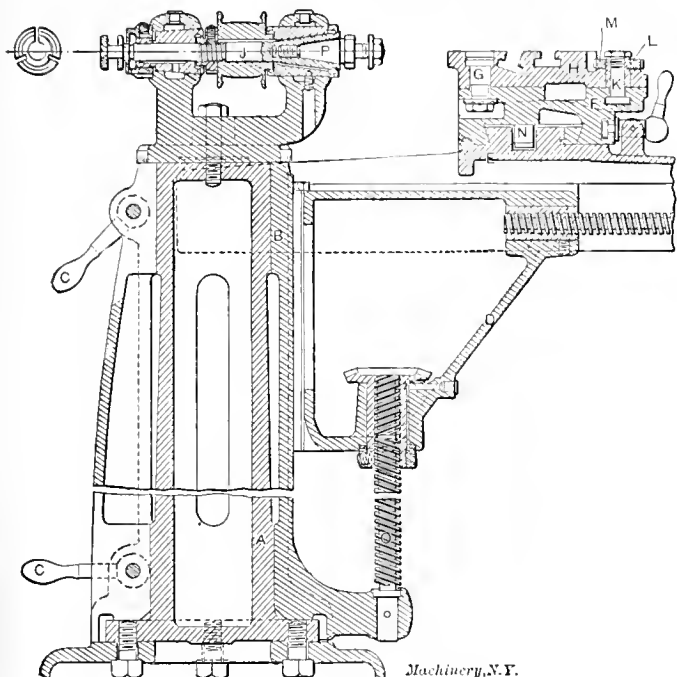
Vertical Section through the Table, Knee, and Column, showing the General Construction.
